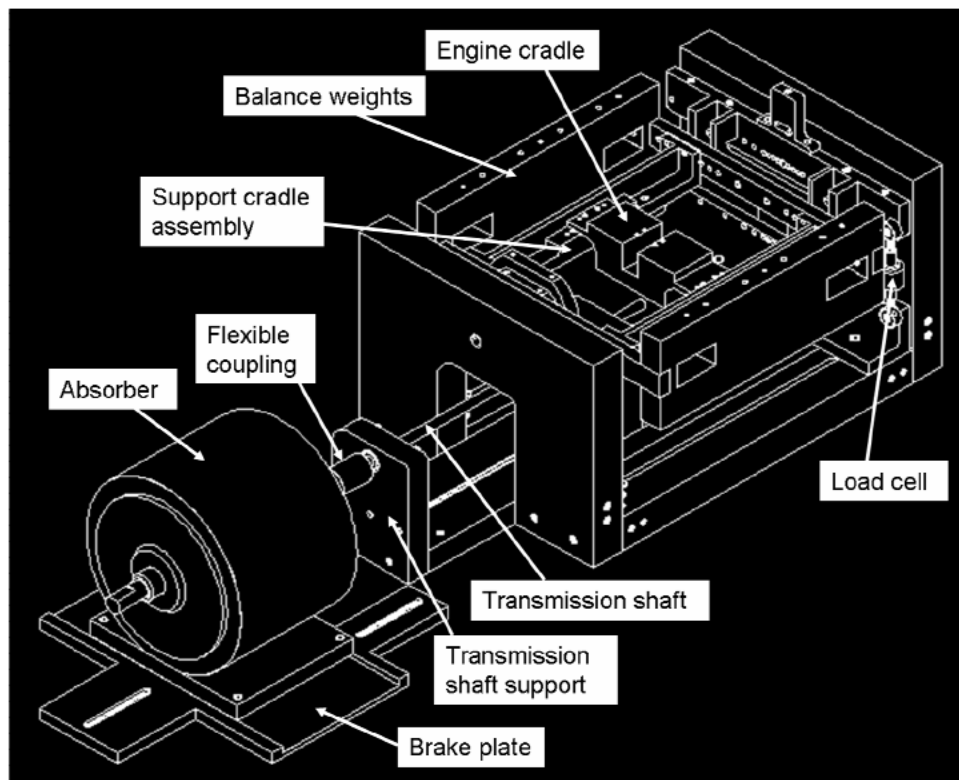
Structural layout of the dynamometer cradle assembly and brake.
